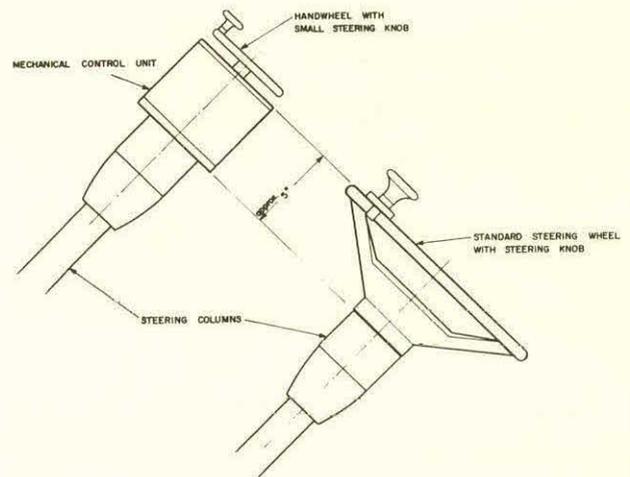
Side view of Mechanical Control Unit and standard steering wheel.
